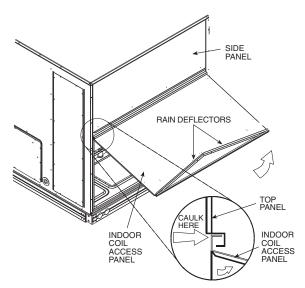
Indoor Coil Access Panel Relocation (Size 16 Shown)
